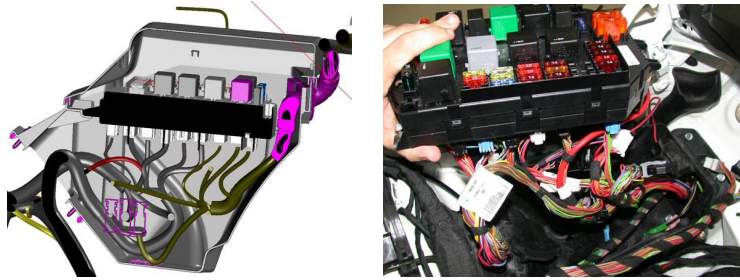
CAD - representation of a module in the assembled state and the real situation by assembly.
